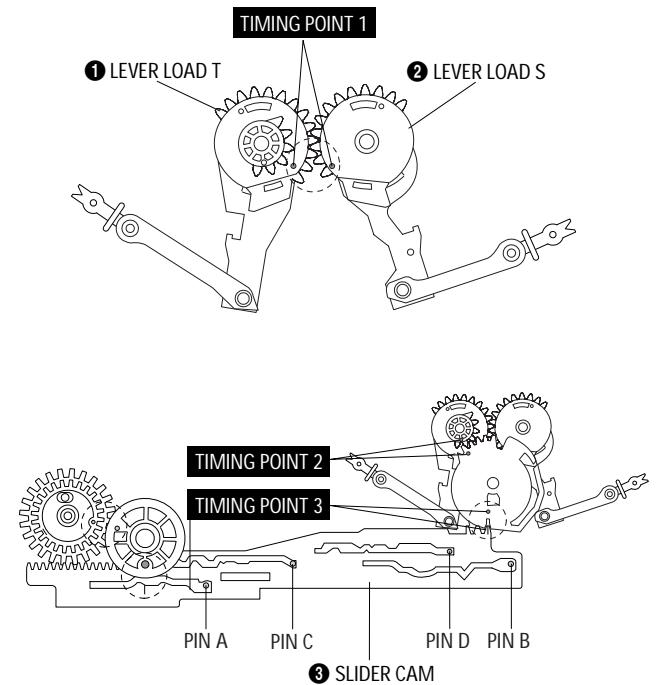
Gear Loading Drive, Slider Cam, Lever Load S, T Ass'y Assembly
